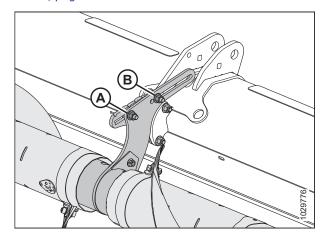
Initial Position of Adjustable Mounts – Two-Piece Auger
